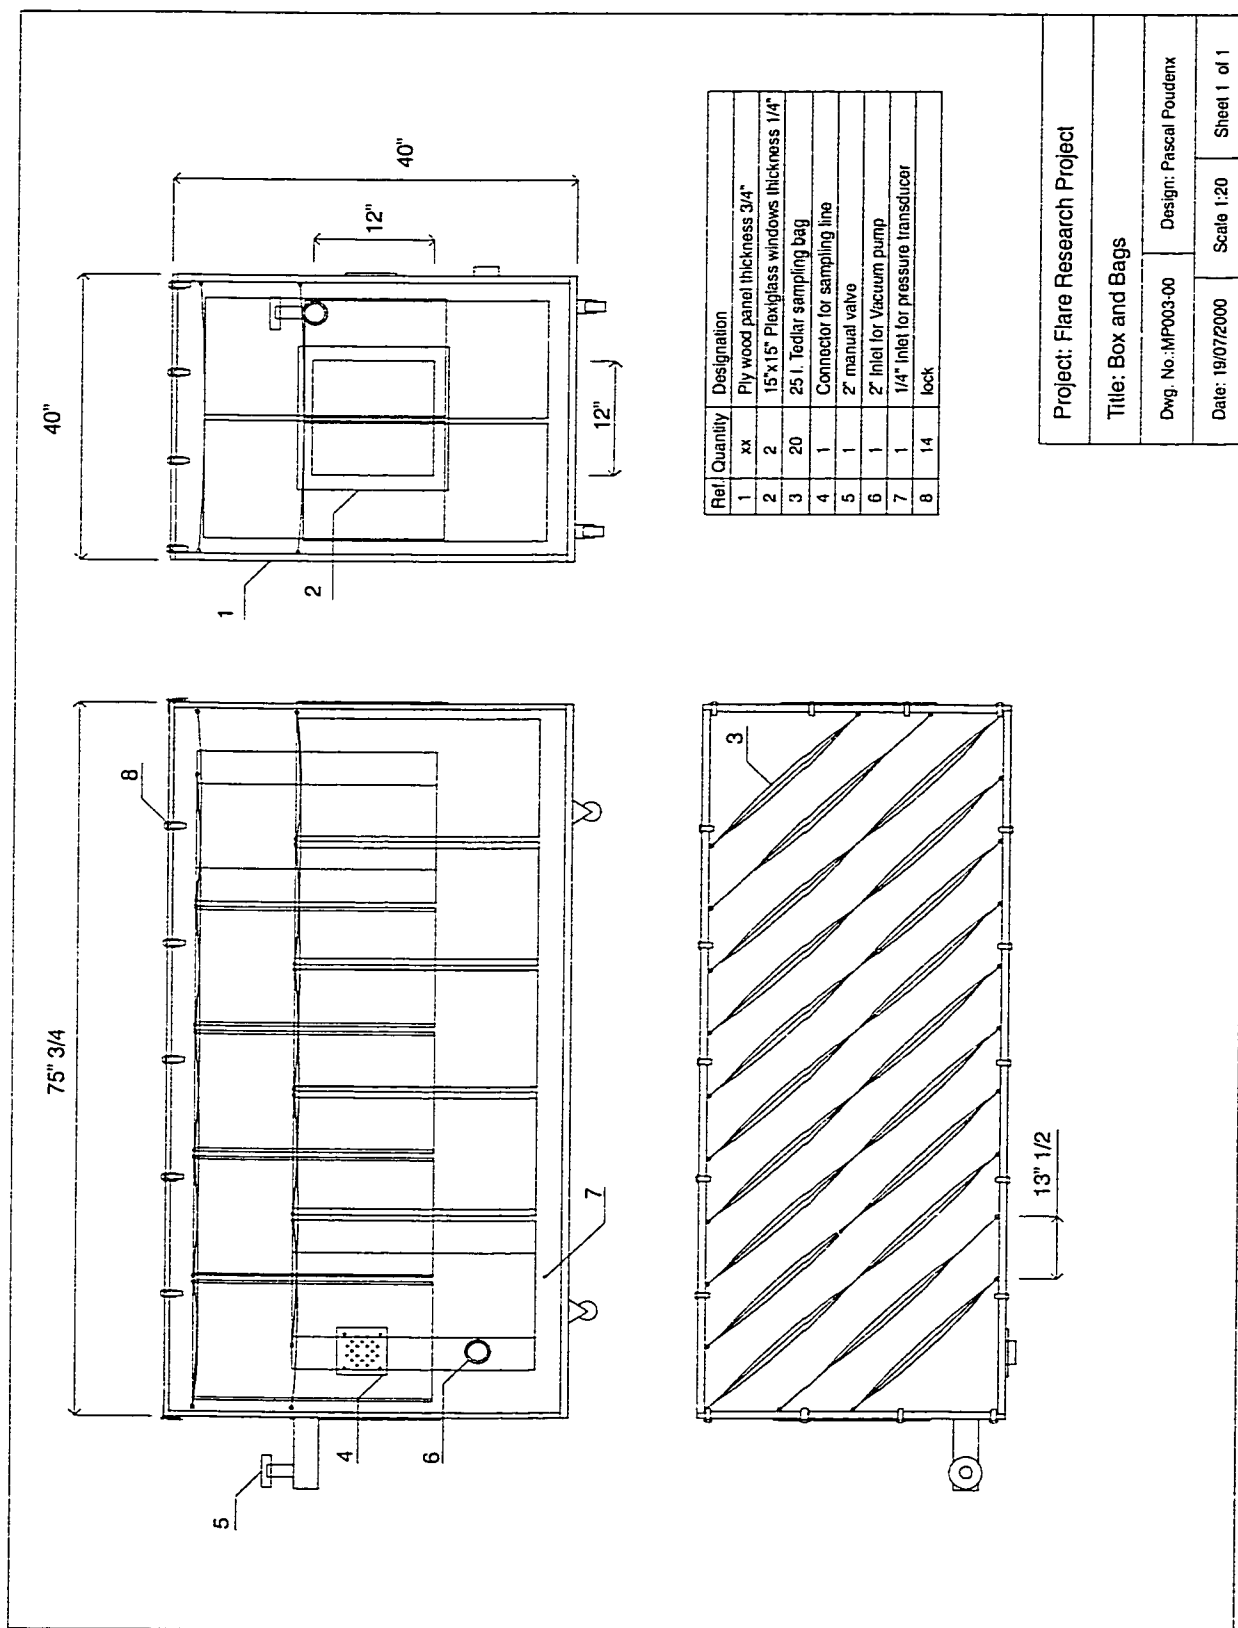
Engineering Drawing of Air-Tight Container with Bags
